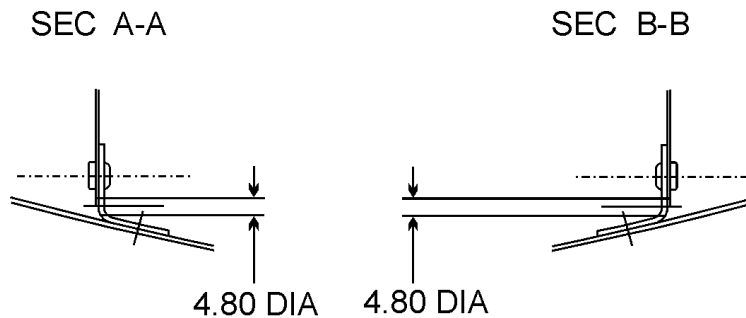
Type C: Central Keel Beams Angles Drain Holes - Sections
